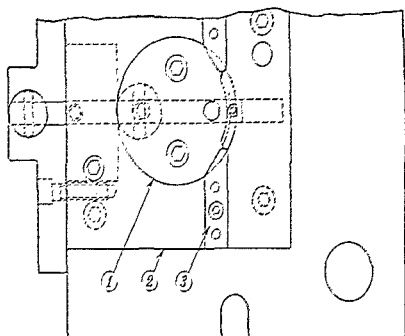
Die to swage bevel and welding projections on a type segment. (National Cash Register Co.)
